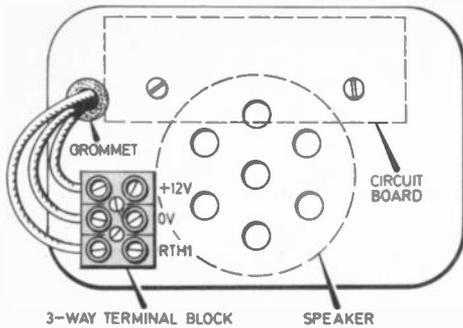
Underside view of case showing speaker "grill" and terminal block.
